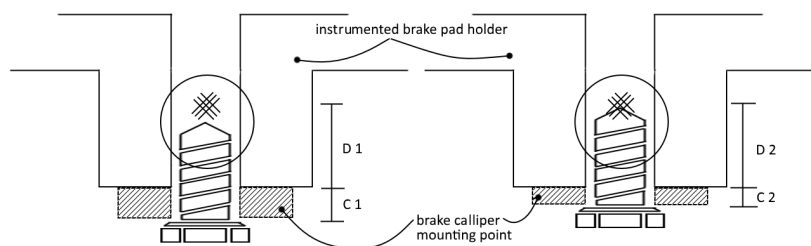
Drawing of the different amounts of bolt present in the aluminium brake pad holder.
